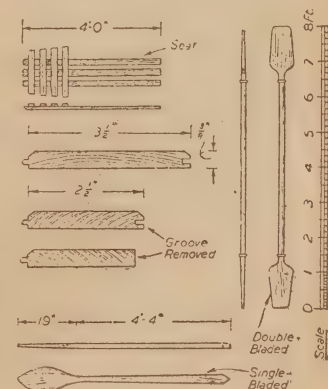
Details of seat, paddles, and sections of tongued-and-grooved sheathing material used in making the hull.
